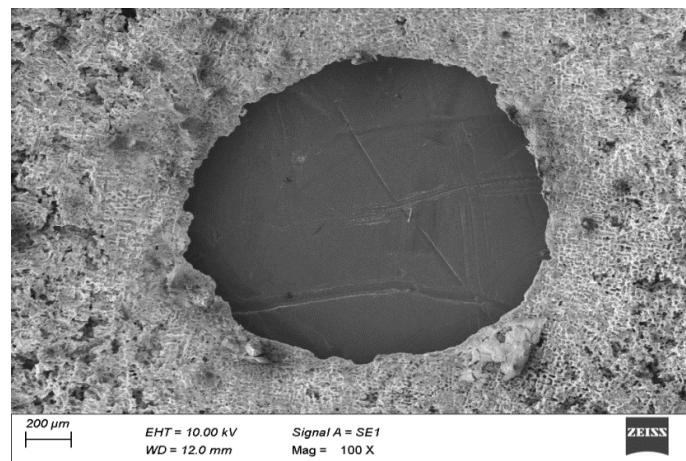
Micro-hole machined at 10 V, 90 % and 25 g l⁻¹
